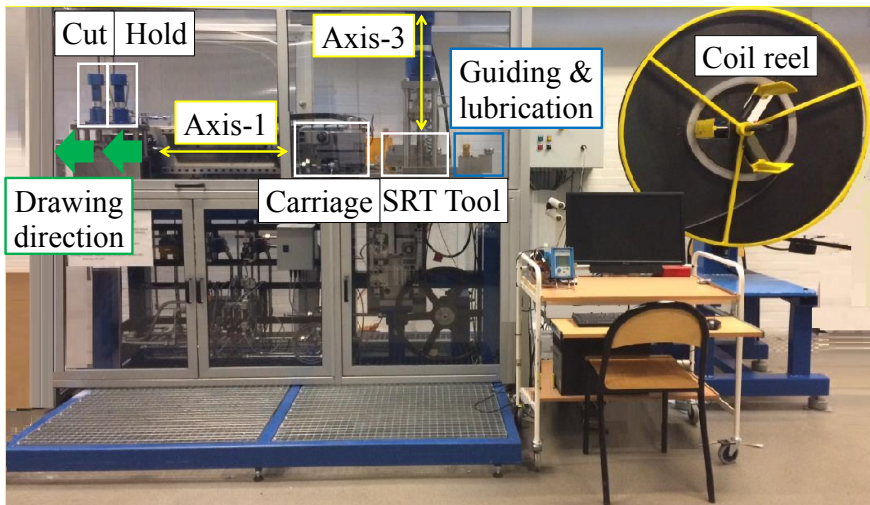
The UST2, equipped with the proposed SRT tool set-up.
